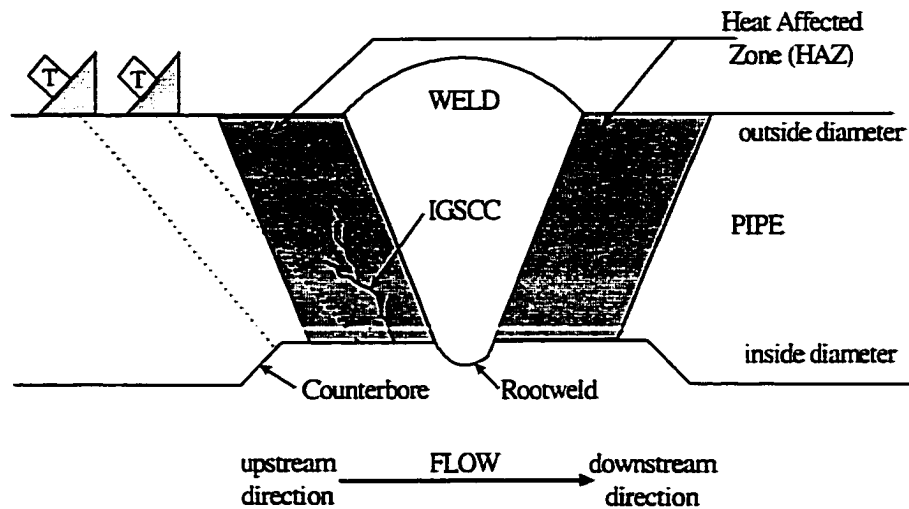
Inspection geometry for ultrasonic weld inspection.
